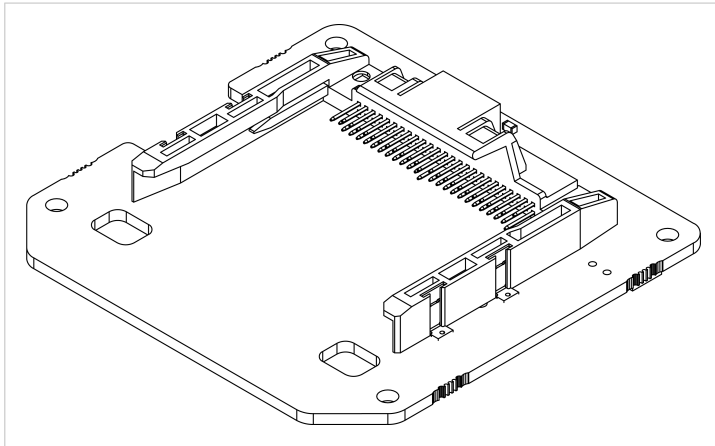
Anybus CompactCom connector on the top side of the adapter board
